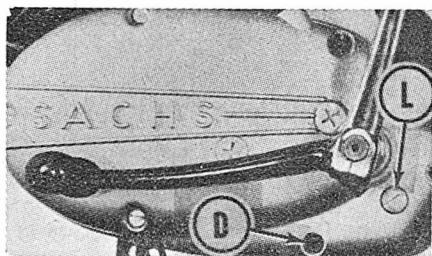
Gear box oil for all models except 100 cc 4-speed should be maintained at level of plug (L).
